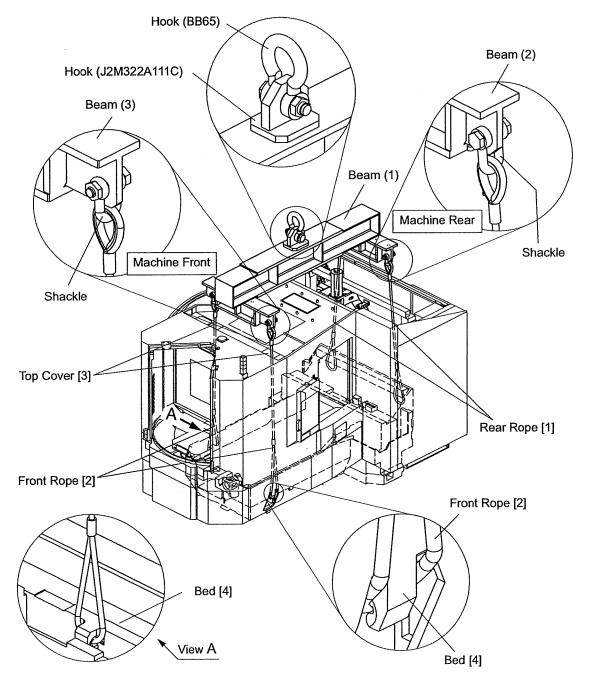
Lifting Main Machine (Using 4-Point Lifting Equipment: a81/a82)
